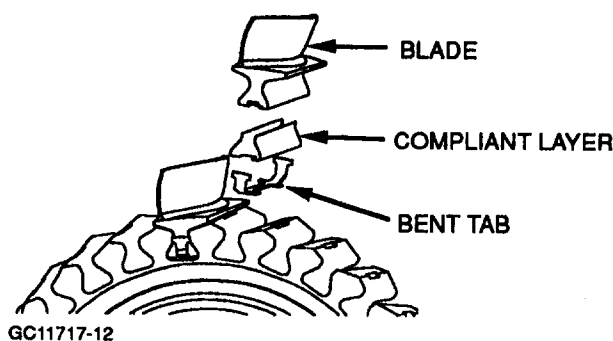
331-200[CT] ceramic blade attachment scheme employing a compliant layer with a conventional metal bent tab retainer
